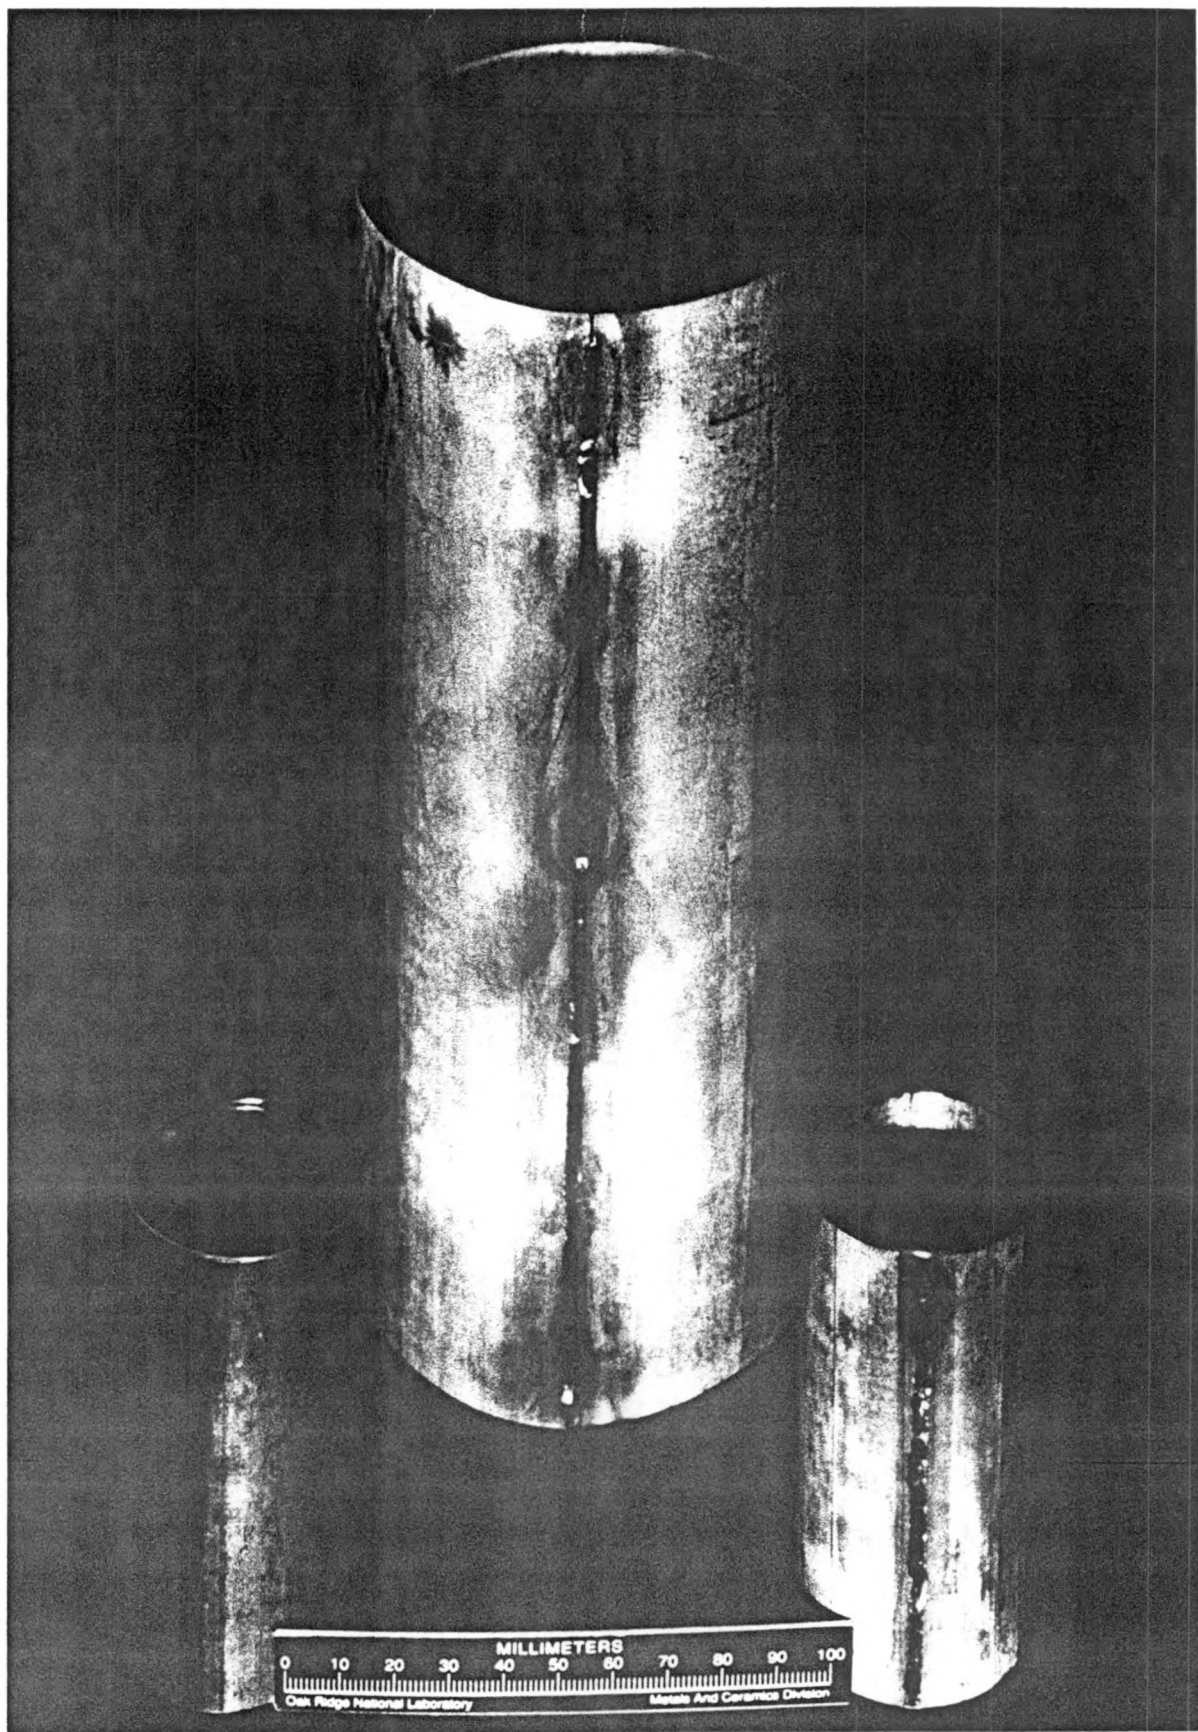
Gas tungsten arc seam welded tubes of nickel aluminide.
